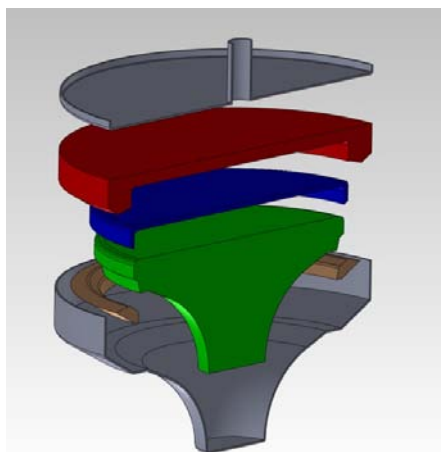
The capsule design. The grey capsule parts are produced as deep drawn steel sheet being assembled by gas tungsten arc welding (GTAW). The forged disc substrate is green while the coating materials are red and orange, respectively. The bonding zone material is blue
